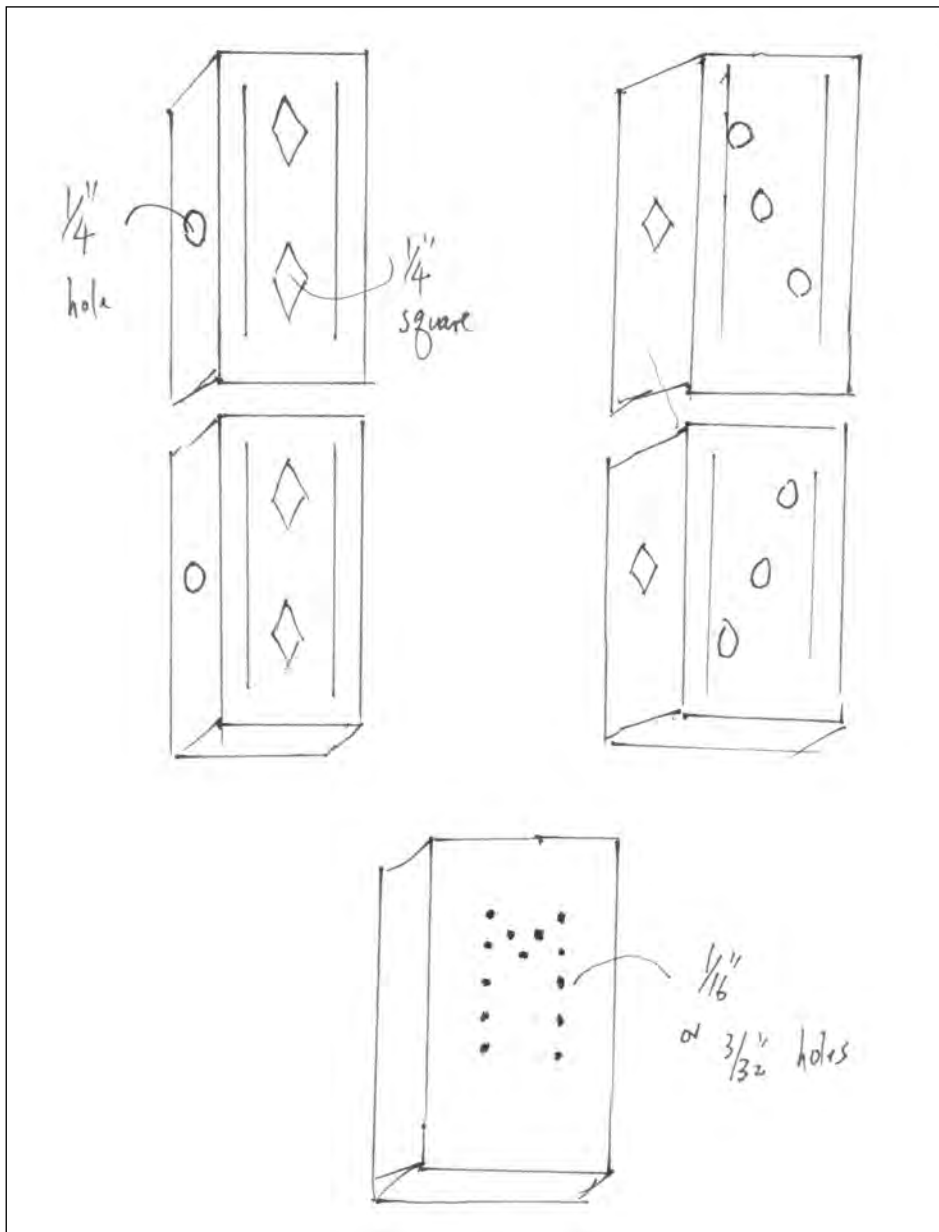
Sketch out your inlay designs to help visualize the patterns.
